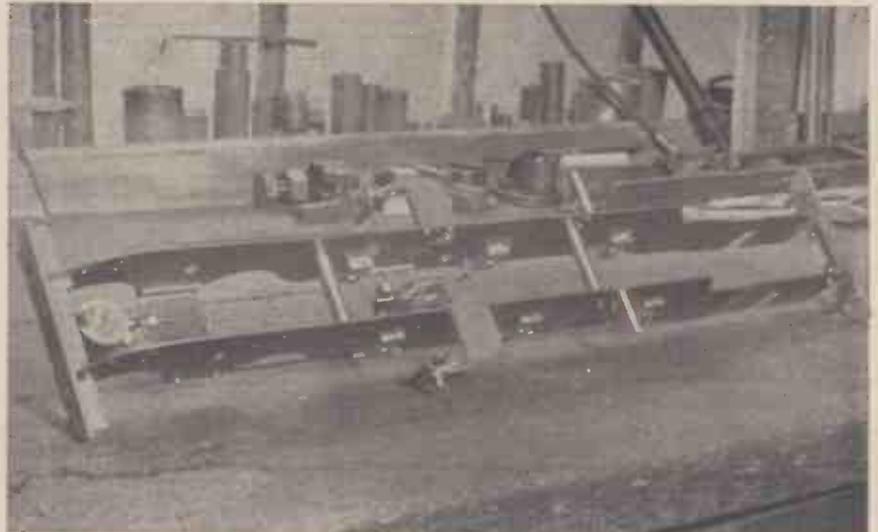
The finished main frames with buffer beams and displacement lubricator in position
